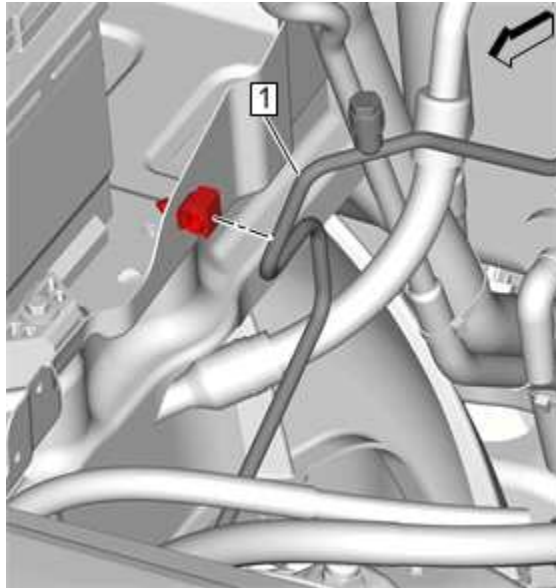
Air Conditioning Evaporator Tube And Battery Tray
